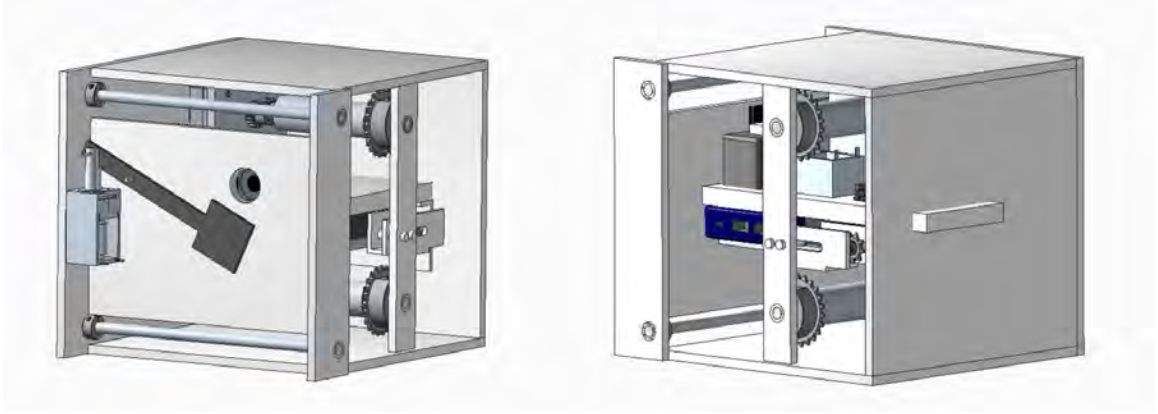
3D view of housing with heat shield and side wall removed. [CREO Rendering]
